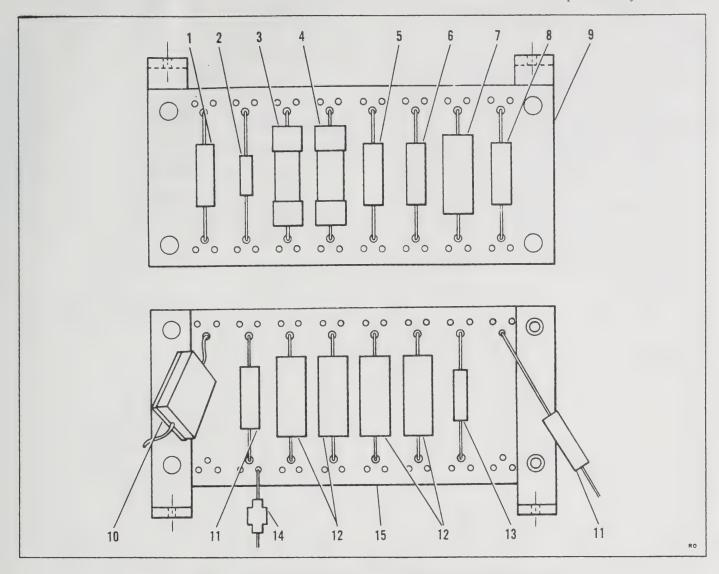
Printed Circuit Board Assembly, Part No. 400D-75G
